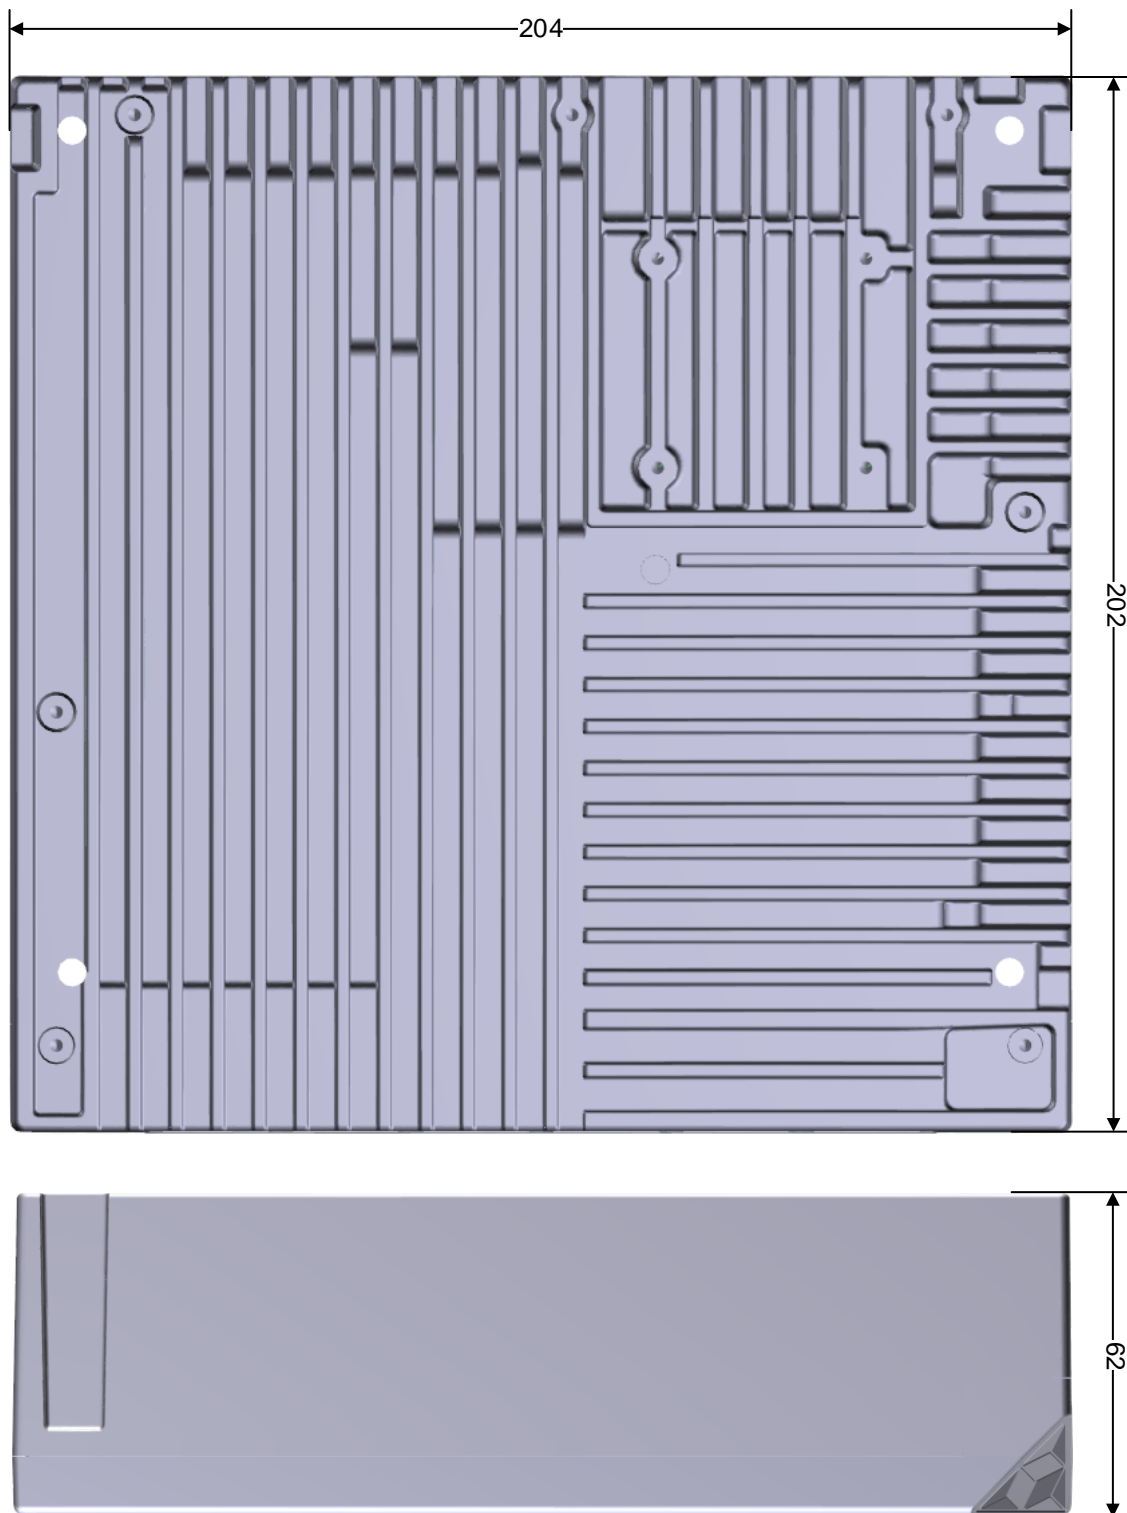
Mechanical outline of the bounding box (dimensions in mm)
